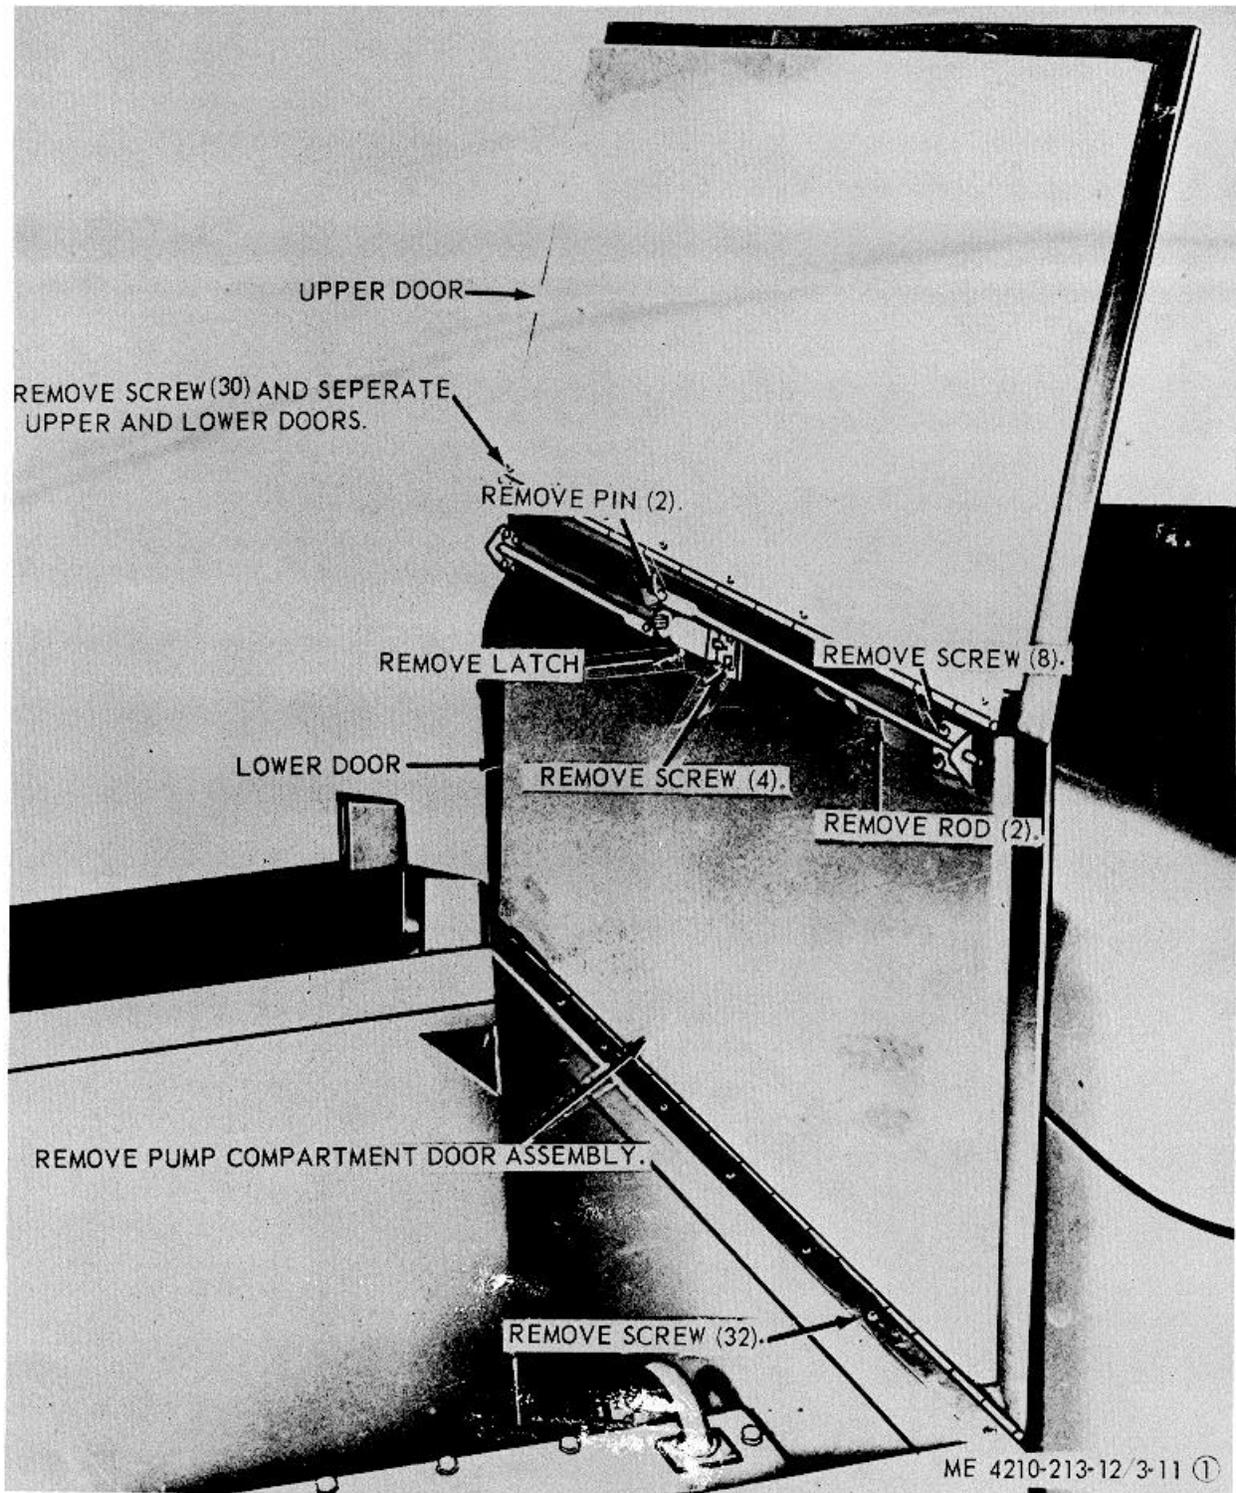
Pump and hose reel compartment door assemblies, removal and installation.
